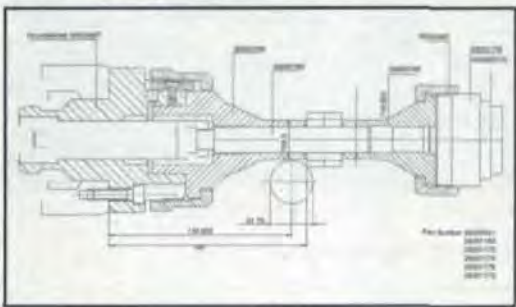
Precision quick-change, face-clamping fixture for clamping more than 150 types of parts.
